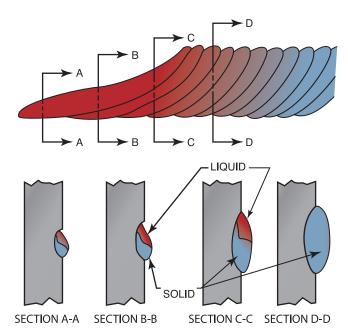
The actual size of the molten weld pool remains small along the weld.
